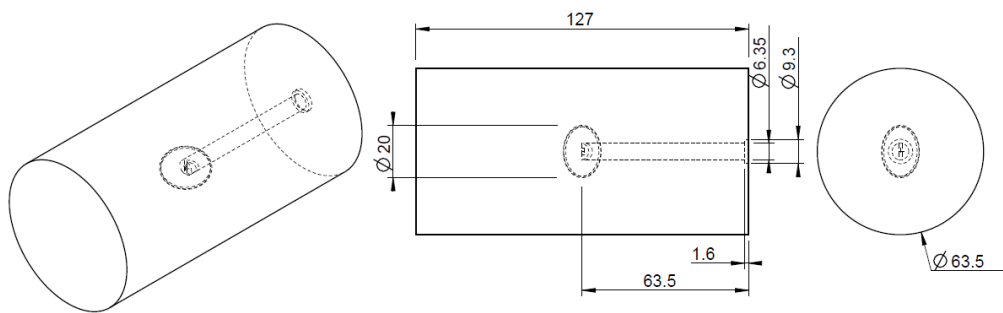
Hydraulic fracturing specimen dimensions with 45° inclined circular crack
